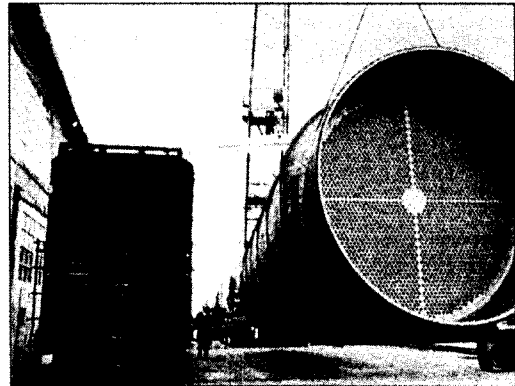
Finished Vessel Fabricated from Explosion Clad Plate (Explosive Fabricators, Inc Photograph)
